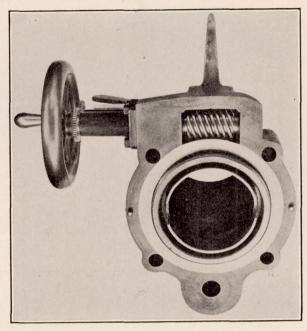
View of cylinder guide, jacket, and barrel from bottom, with handwheel and mechanism for effecting change of compression ratio
